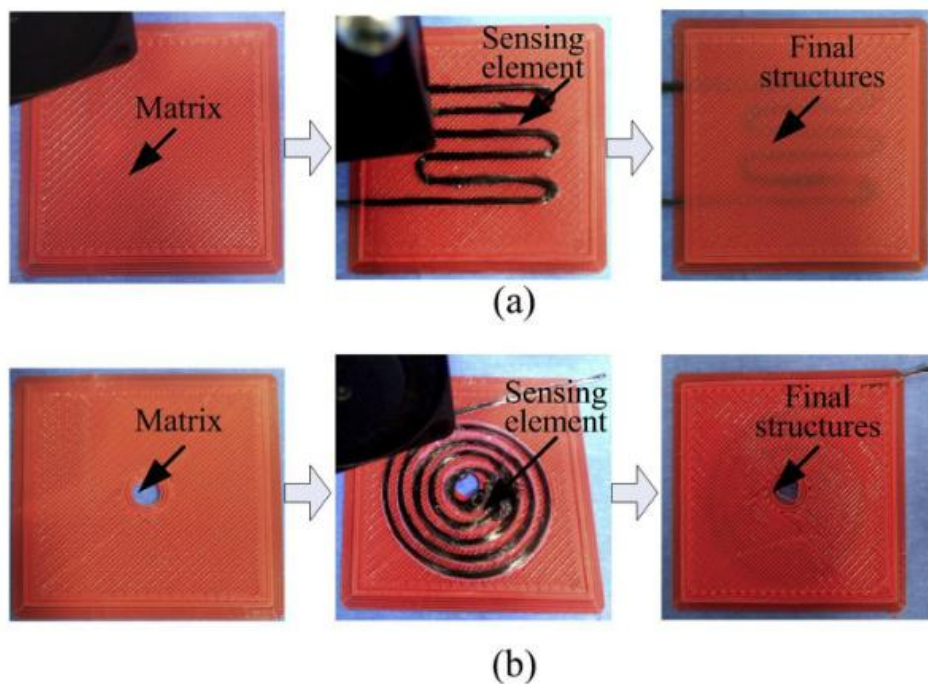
Complicated shape sensing element printing: (a) snake shape, (b) helix shape [9]
